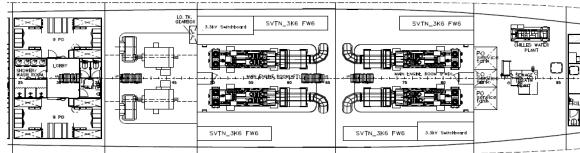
Section of the General Arrangement Plan of the main engine room configuration
